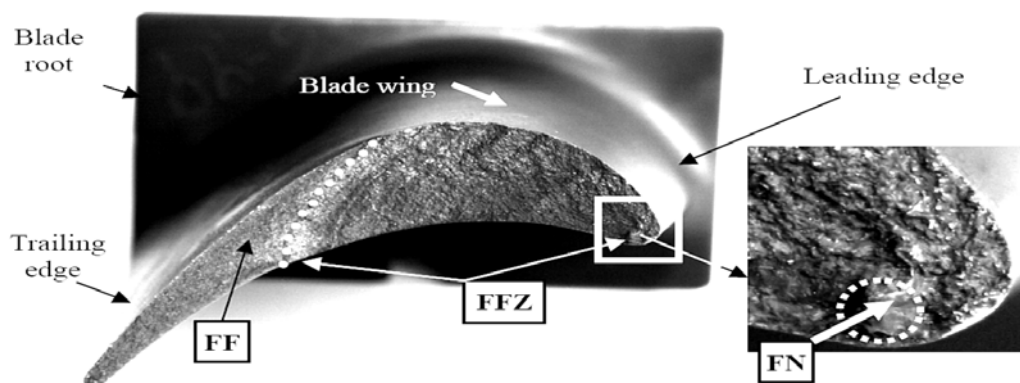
A part of the service fracture of the blade wing of the second stage of a low-pressure turbine rotor (FN=fracture nucleus, FFZ=fatigue fracture zone, and FF=final fracture) [30].
